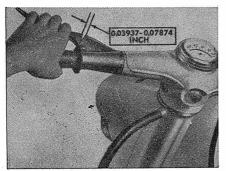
Clutch hand lever should have 1-2MM free play as shown.
